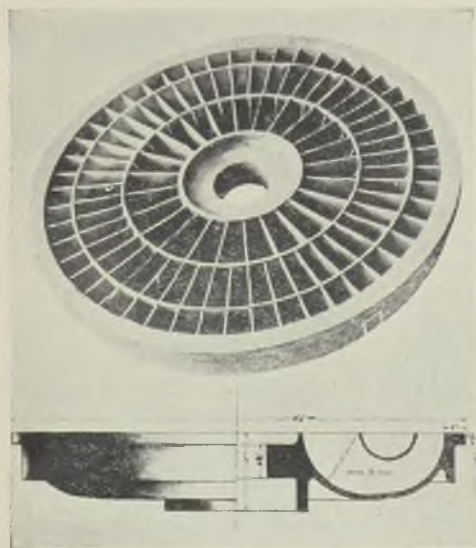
shows a casting consisting of a heavy boss $4\frac{1}{4}$ in. thick, and a heavy outer flange and ring $1\frac{5}{8}$ in. thick, united by light webs, $\frac{1}{8}$ in. thick. It affords a good illustration of the advantages of single-phase solidification. In the commoner bronzes the webs solidify and begin to shrink while the boss, and outer flange, are still in a more or less pasty condition.
